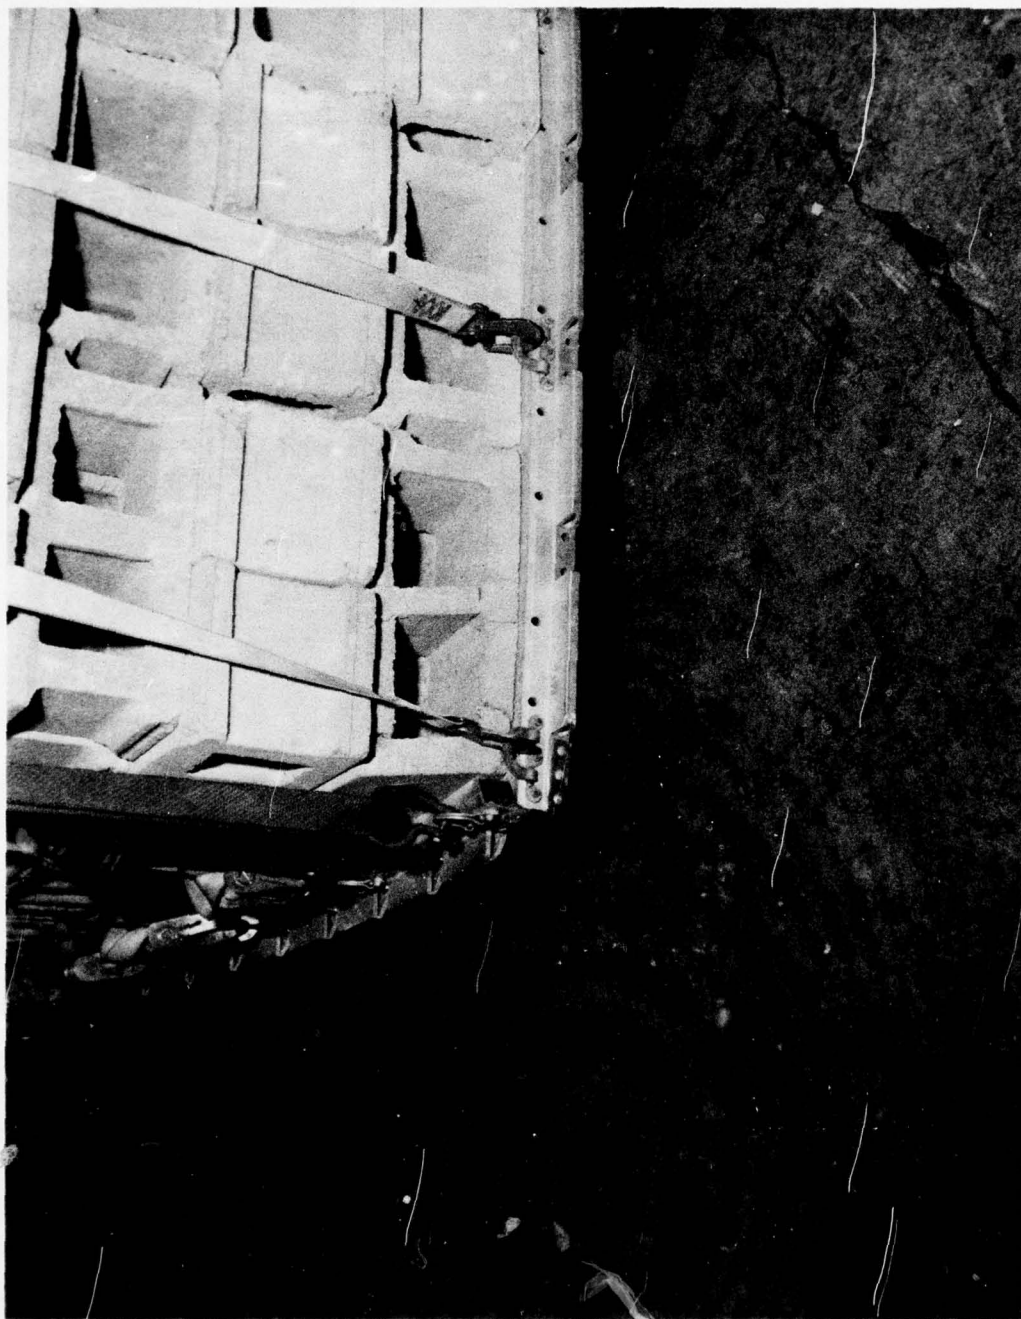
SLING LOAD TEST - RAIL FAILURE
